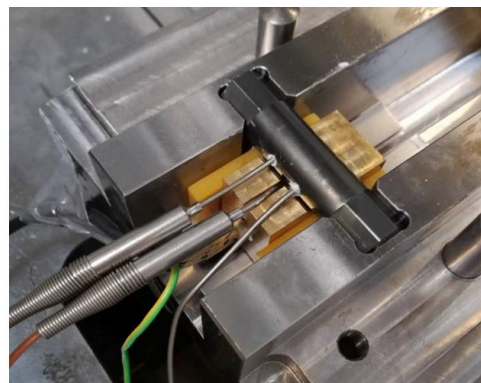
shows the lower tool pin sitting on the support and three thermocouples mounted inside the tool pin. The heating cartridge was inserted in the tool support. All the thermocouples and the heat cartridges were coated with thermal paste before insertion to secure a high level of heat transmission.
